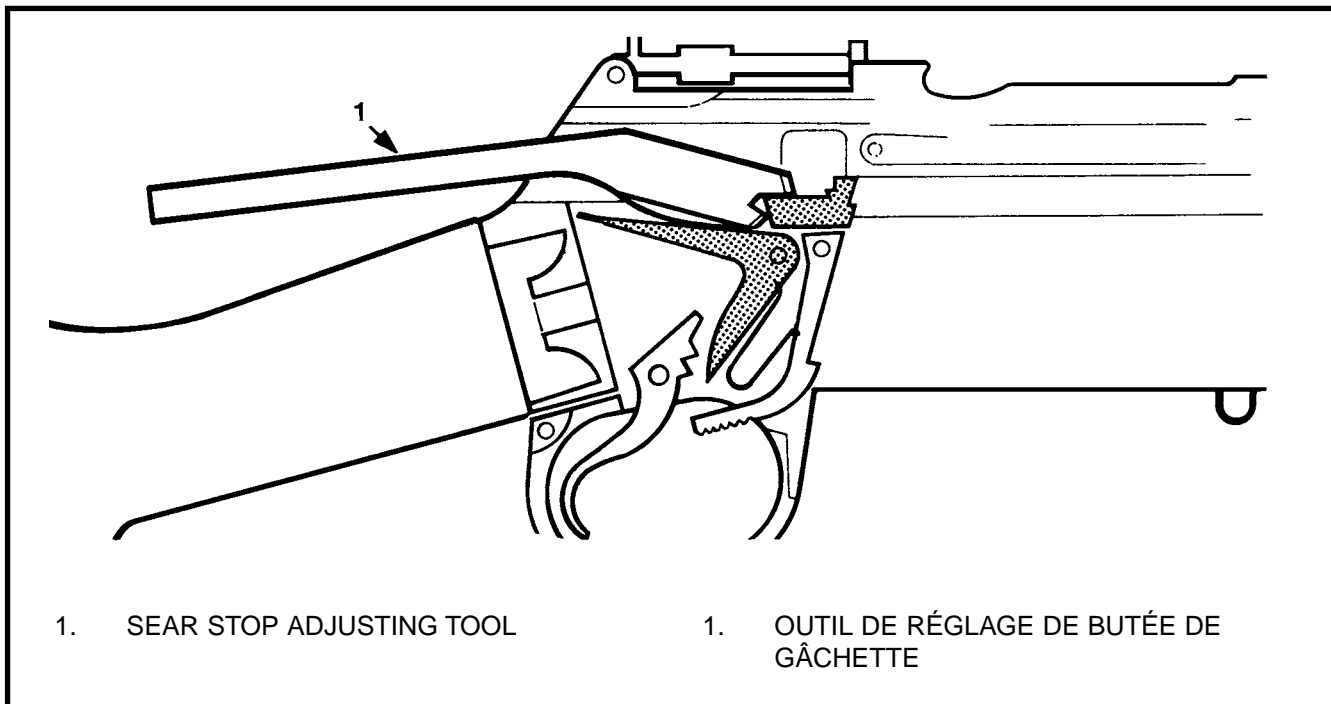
Position of the Sear Stop Adjusting Tool
